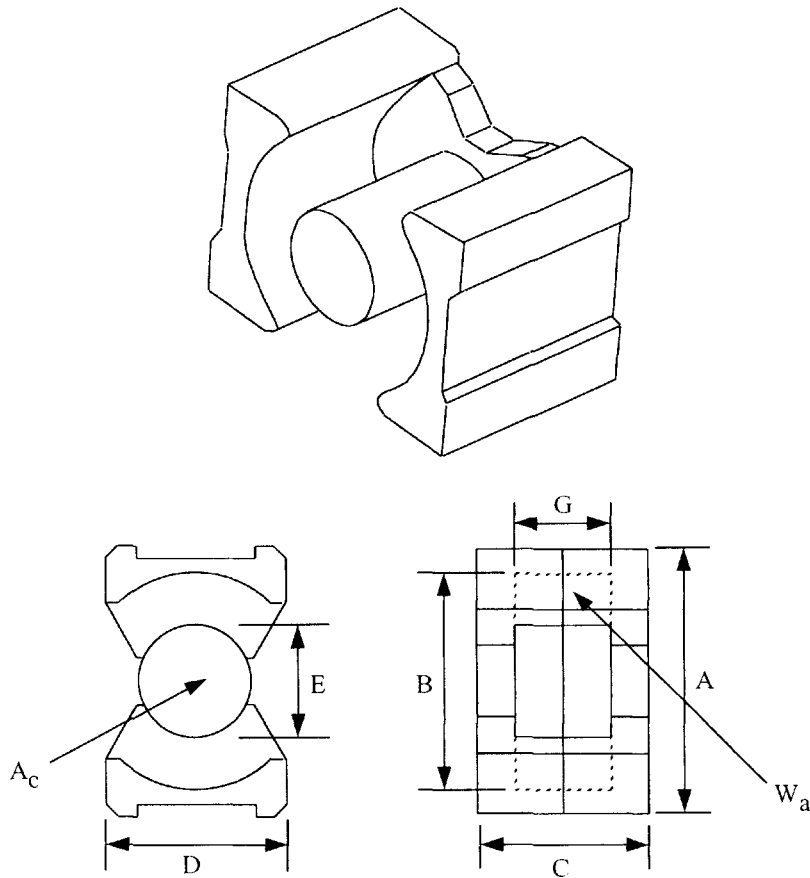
Dimension Outline for EP Ferrite Cores.
